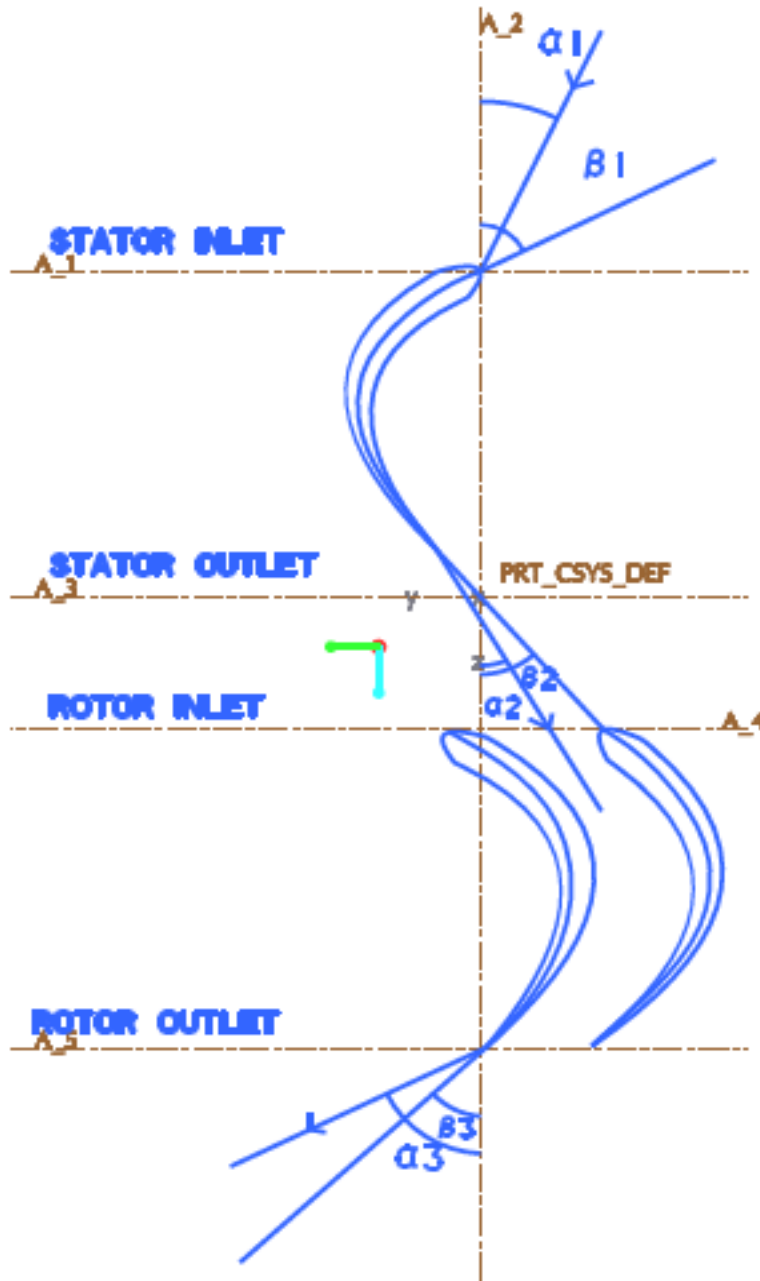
Blade Sectional Drawing Indicating Air Angles α and Blade Angles β
